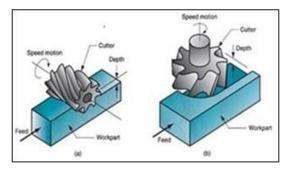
two basic forms of milling operation (a) peripheral milling (b) face milling
